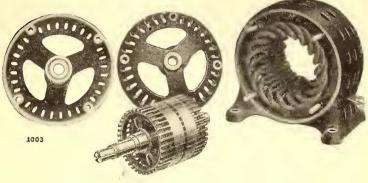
PARTS OF MOTOR READY FOR ASSEMBLING
